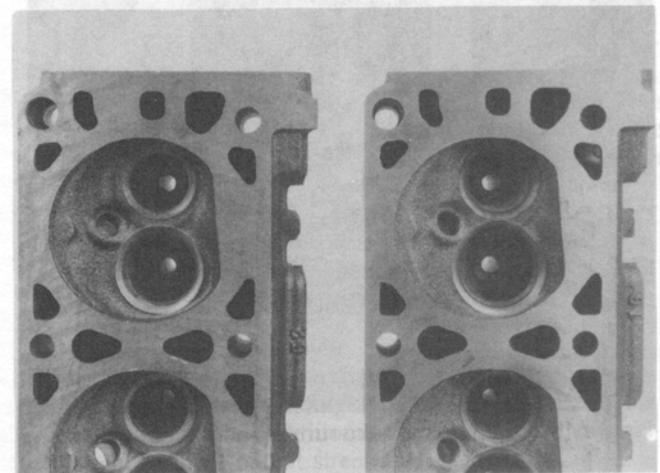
Standard cast iron head (left) has 1.60/1.32-inch valves; high-output version (right) uses 1.72/1.42-inch valves.
